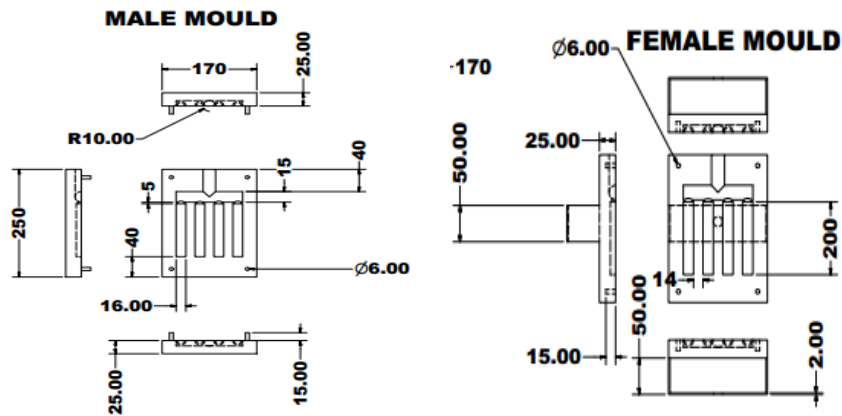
Male and Female Moulds for Squeeze Cast Moulds
